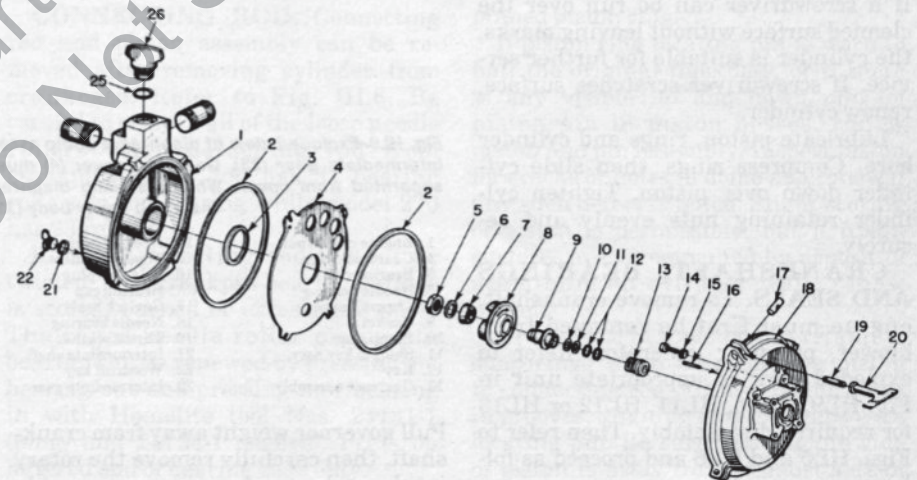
Exploded view of trash pump. End housing and impeller must be removed from impeller housing to allow housing to be unbolted from engine. Model 270 uses a spacer in place of washers (12).
